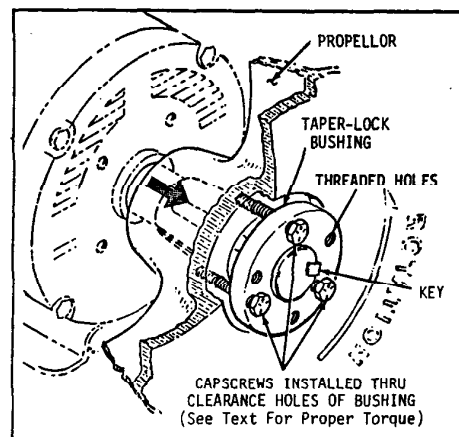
CAPSCREW ARRANGEMENT FOR REASSEMBLY
